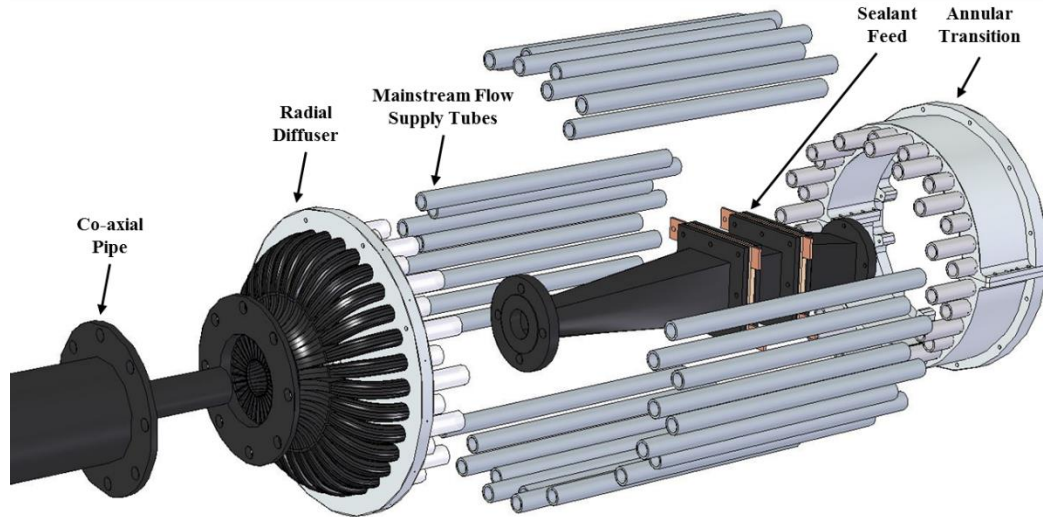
Explode view of mainstream and downstream sealing flow supply assemblies
